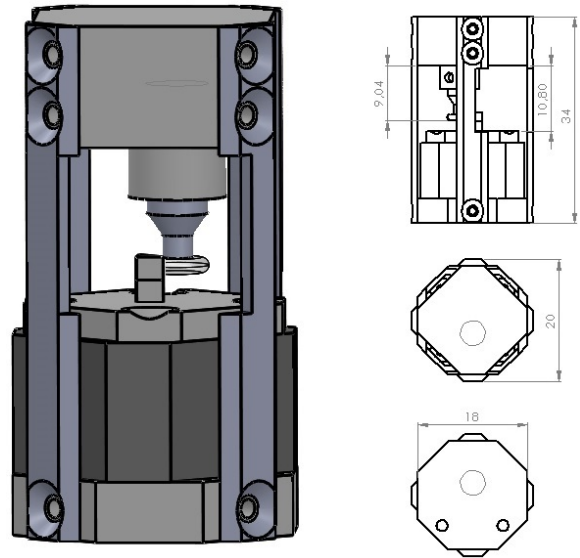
Solidworks model and drawings of the inner frame of the proposed cryostat holder. All dimension are to scale and are in millimetres.
